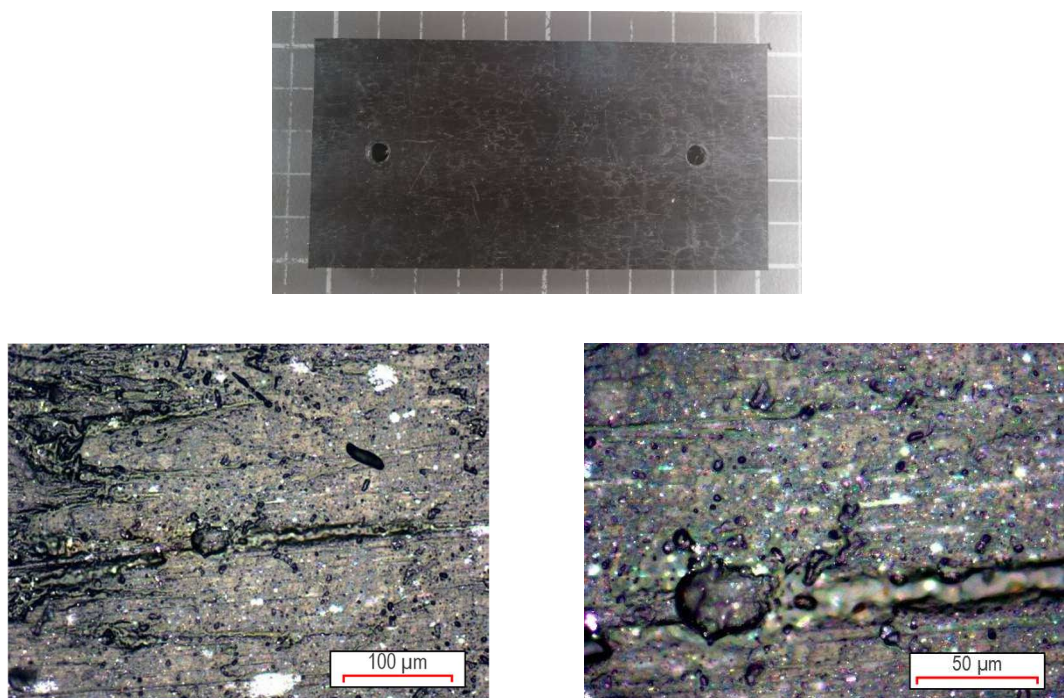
Sample III before testing. Top: machined bearing pad. Bottom Left and Right: Surface images
